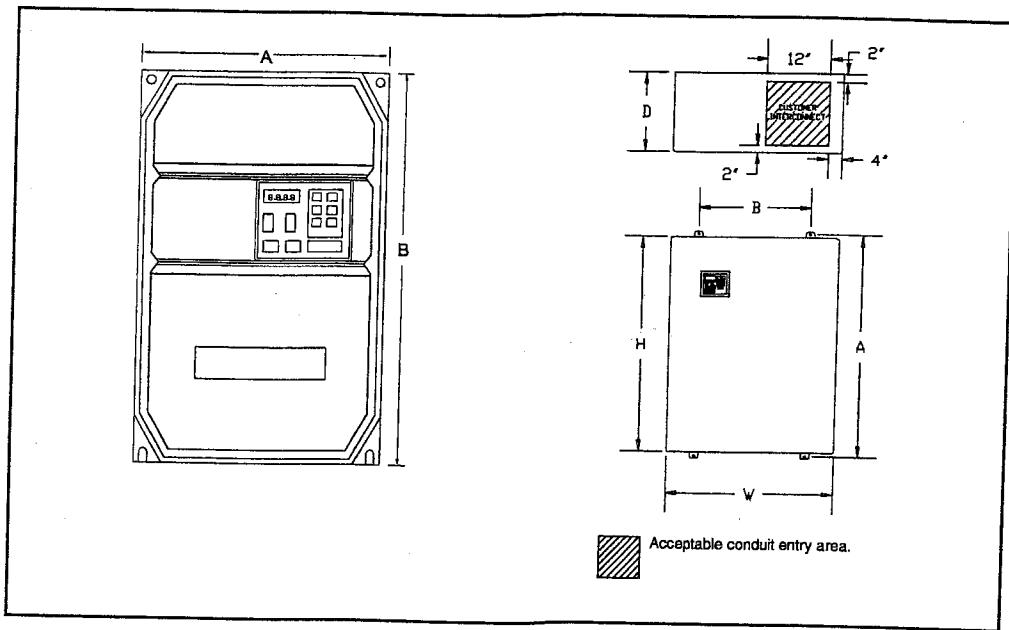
Wall Mounted Drive-Only Dimensions
